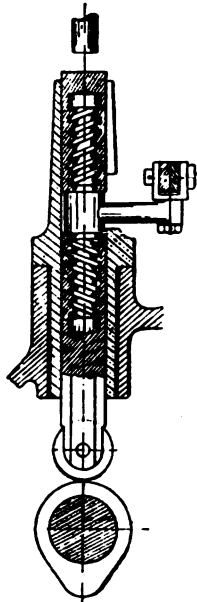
Sectional View of Variable Valve Lift Mechanism on Metallurgique Cars.
